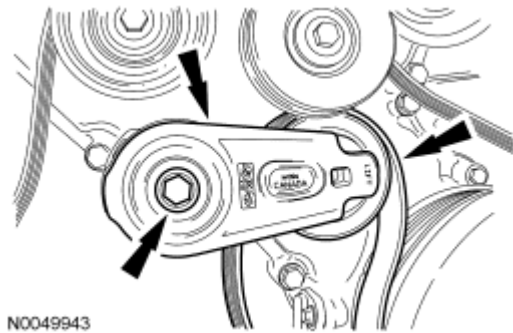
Locating Bolt, Supercharger (SC) Drive Belt Tensioner & SC Drive Belt
